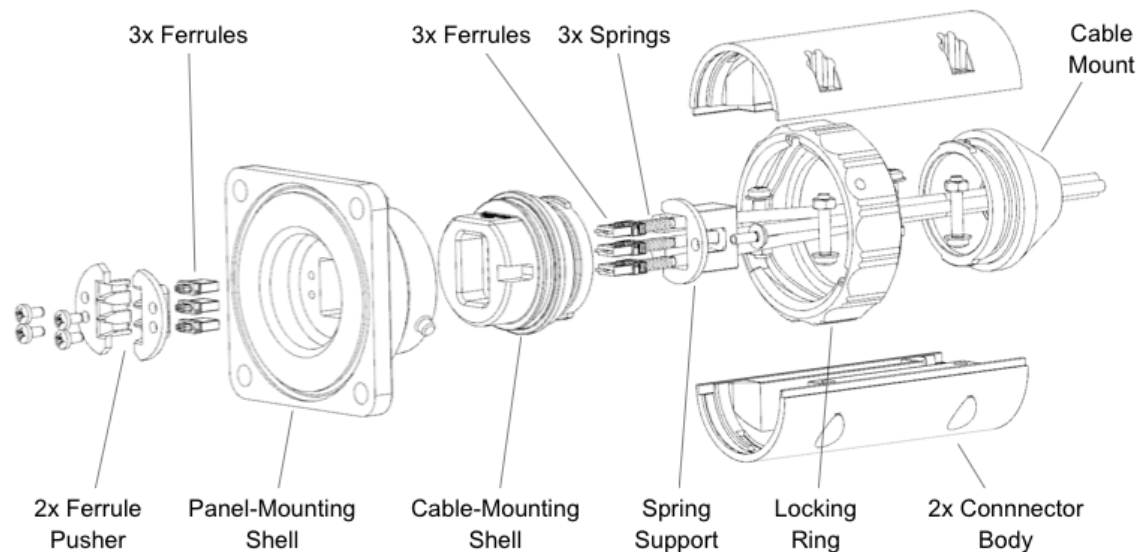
Expanded CAD view rendering of the bespoke umbilical connector showing both the panel-mounting and corresponding cable-mounting connector parts in an ‘exploded’ arrangement.
